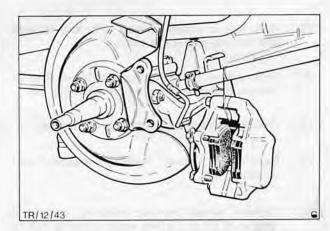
Suspend caliper by a suitable piece of wire. (Hub and disc removed for clarity)
